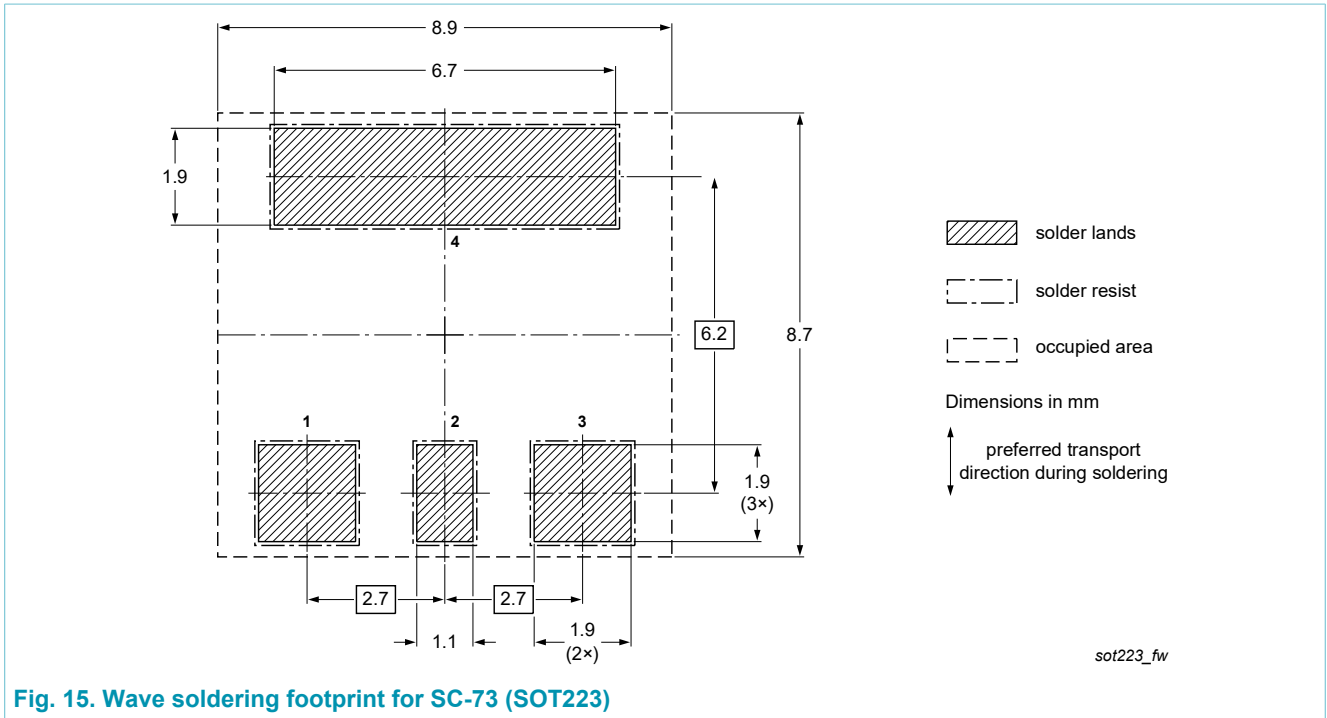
Wave soldering footprint for SC-73 (SOT223)
